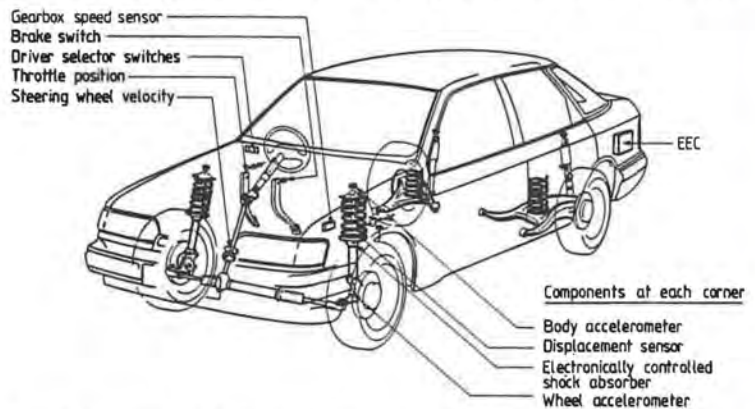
Layout of adaptive-damping system. (EEC indicates the electronic engine controller module.)
